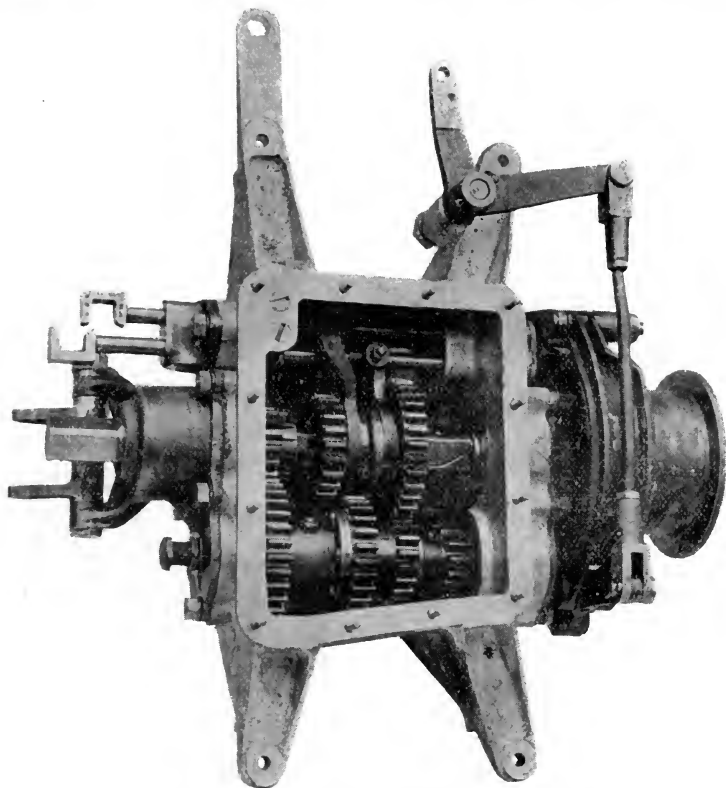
DIRECT DRIVE GEAR BOX, FIRST SPEED POSITION.
